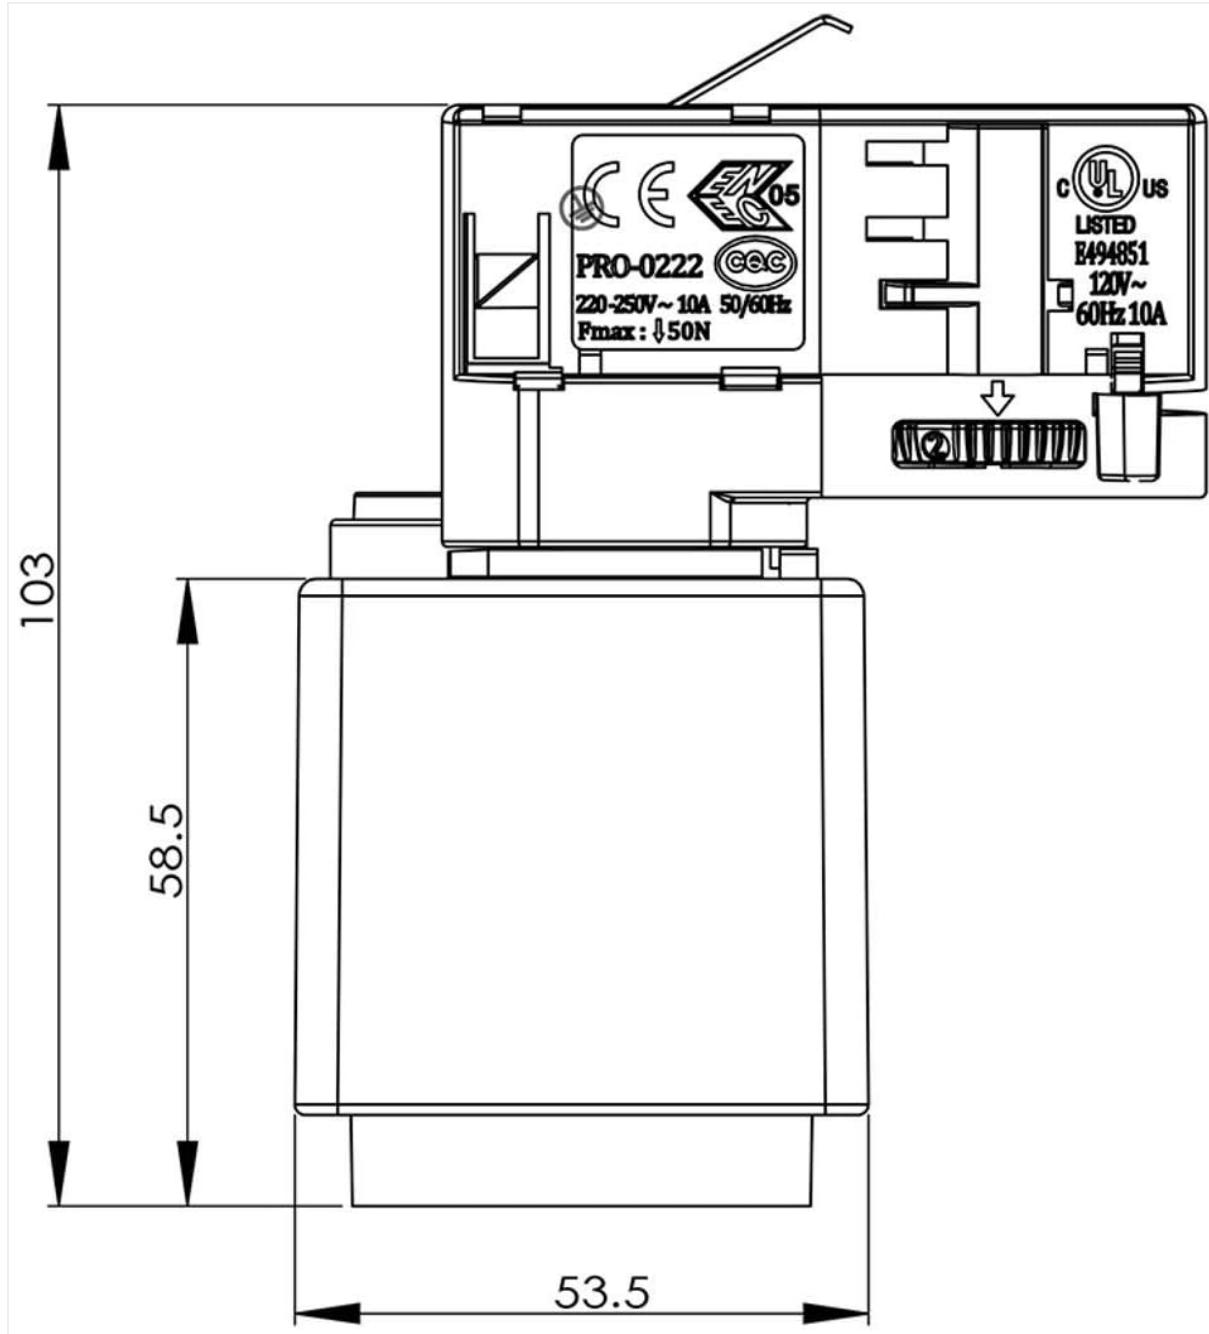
Technical drawing illustrating the dimensions of the Deko-Light D LINE Power Outlet Adapter. Key dimensions include a total height of 103mm, a body height of 58.5mm, and a width of 53.5mm. The drawing also shows electrical specifications: 220-250V~, 10A, 50/60Hz.
